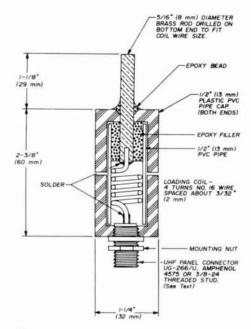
Cross-sectional drawing of completed loading coil assembly.
